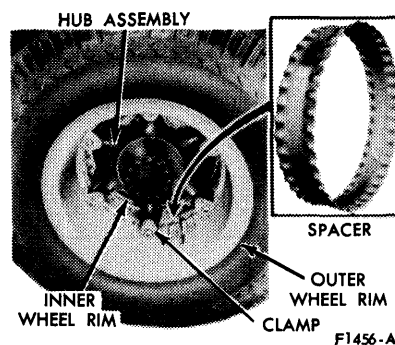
Three-Piece Rim Installed on Cast Wheel
